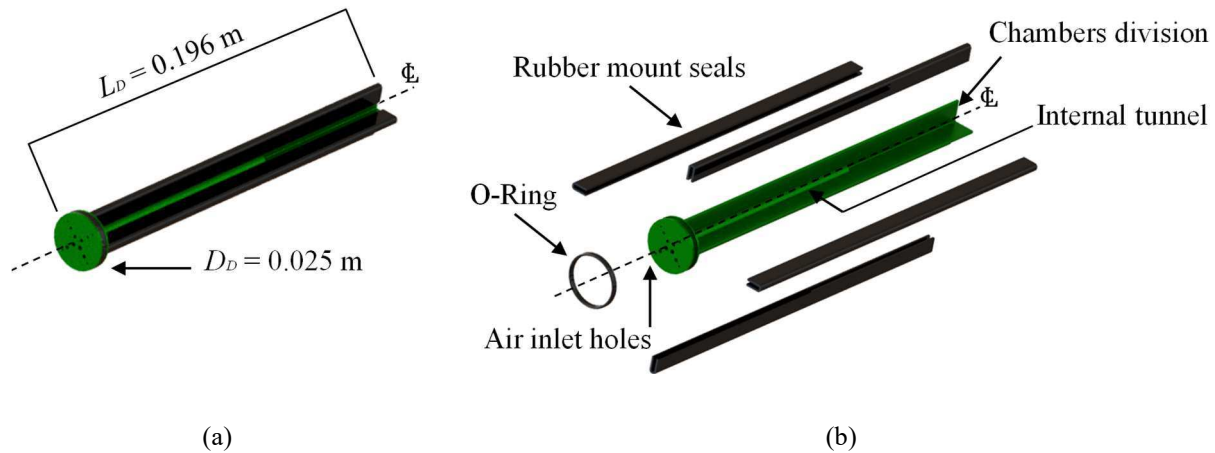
3D views of the air distributor design (a) fully assembled and (b) disassembled components.
